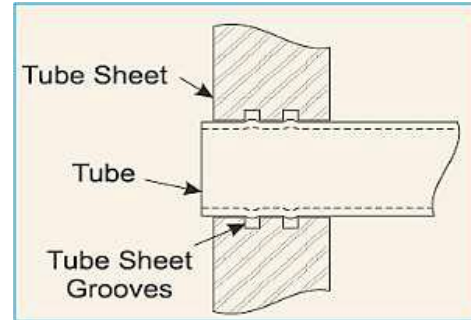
Tube Sheet of Shell & Tube Type Heat Exchanger
